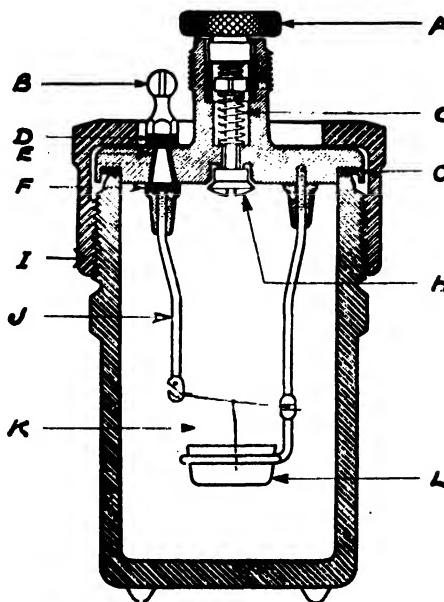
DETAILS OF THE ILLIUM OXYGEN BOMB.
